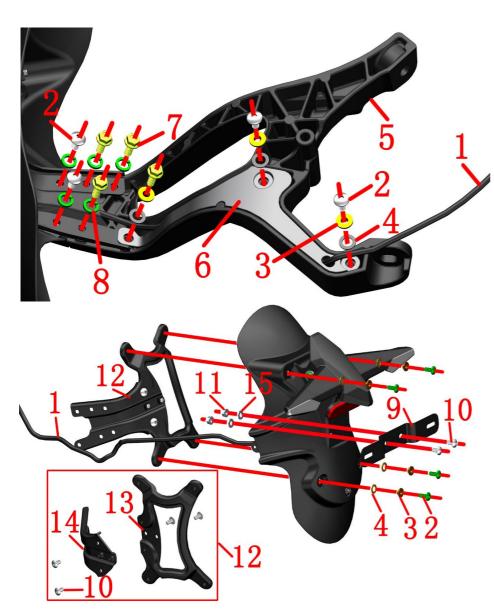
Re	ear wheel, swinging	Rear sub-mud assembly 1	CHK	401
